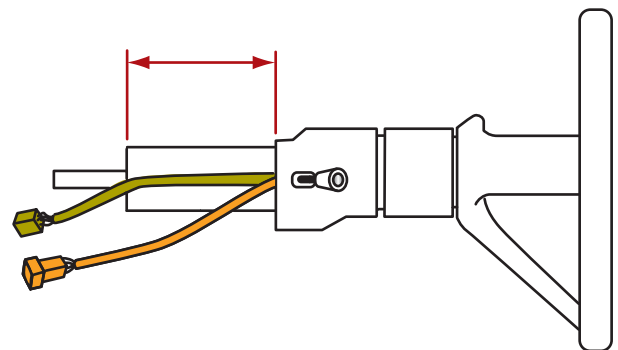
Measuring distance from the end of the bearing assembly to the upper steering column jacket.
